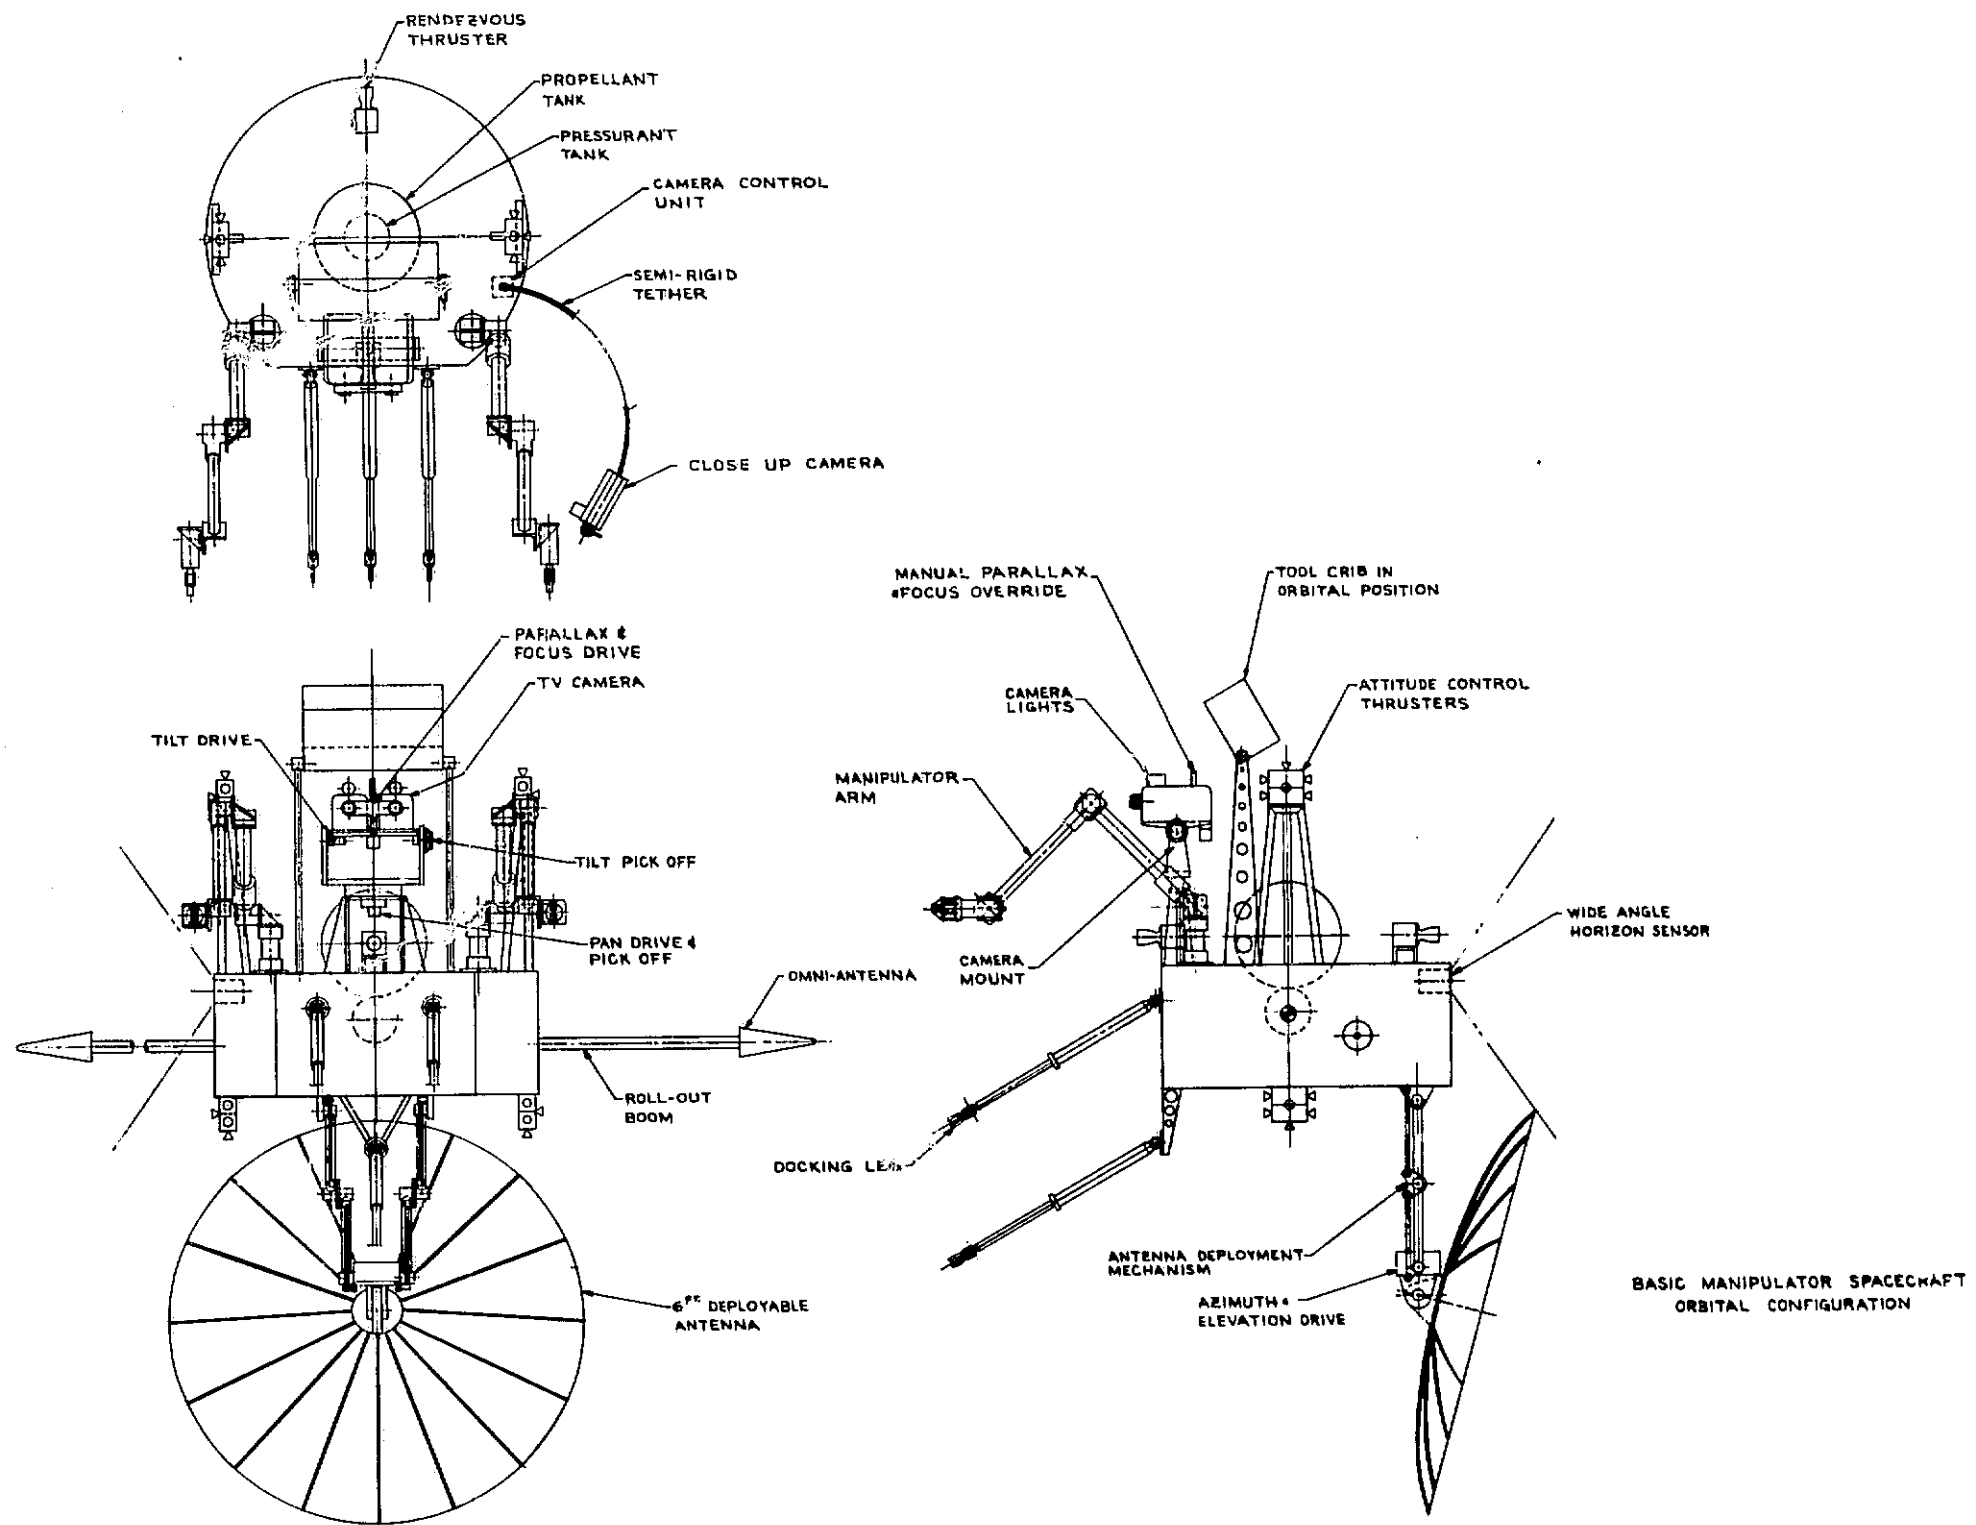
Three View Drawing of Remote Manipulator Spacecraft
